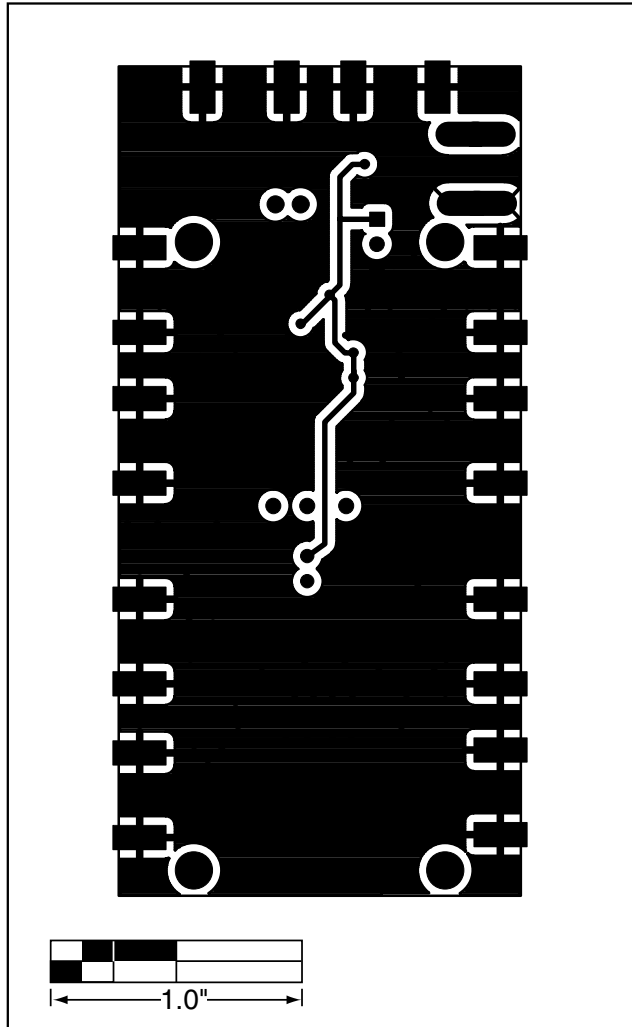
MAX3971 EV Kit PC Board Layout—Solder Side
